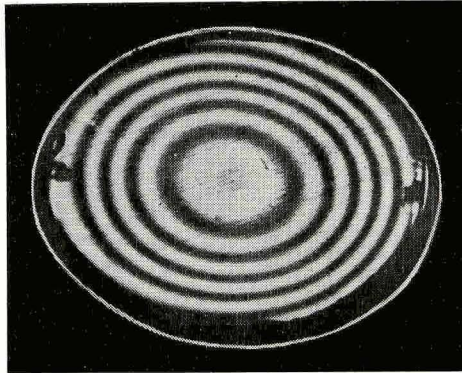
When an eight lines/one mm plane grating is placed on the flat top of a can having a good internal vacuum, the moiré appearance is as in this photograph.
